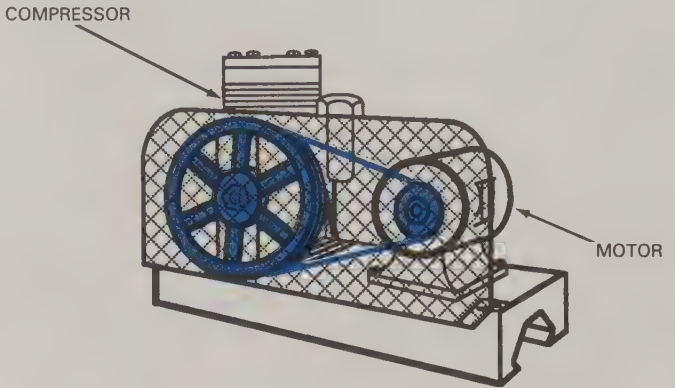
Many open-type compressors are driven by a V-belt connecting a pulley on the crankshaft with a pulley mounted on the motor shaft. A safety guard of metal mesh over the belt and pulleys is normally used.
